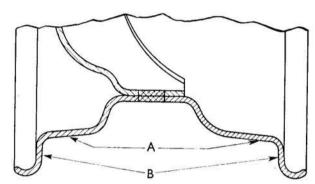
Sectioned view of wheel rim, showing the checking points for radial run-out at 'A' and lateral run-out at 'B'
